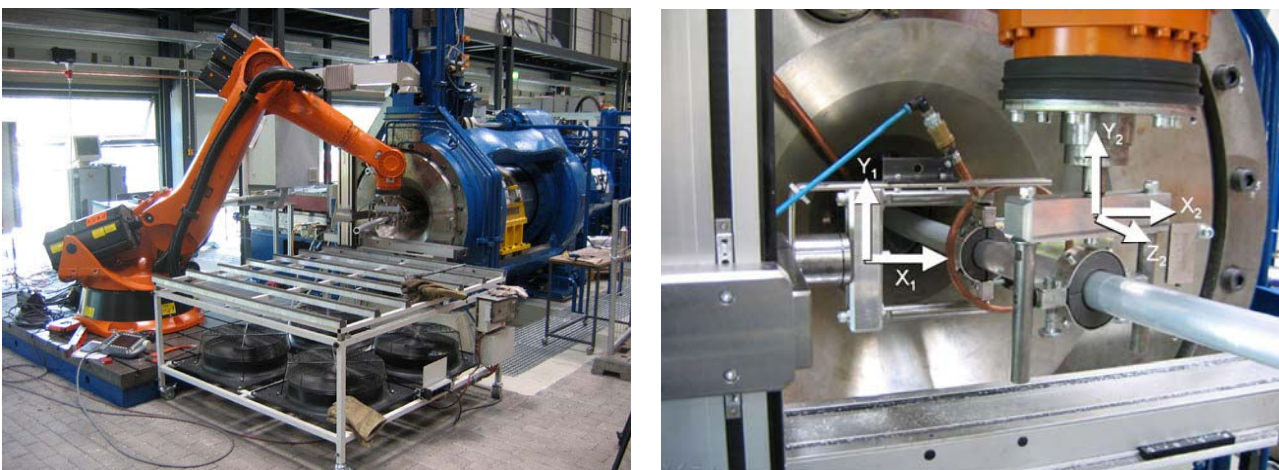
Extrusion press with Kuka robot (left). Close-up view on first and second guiding tool (right).
